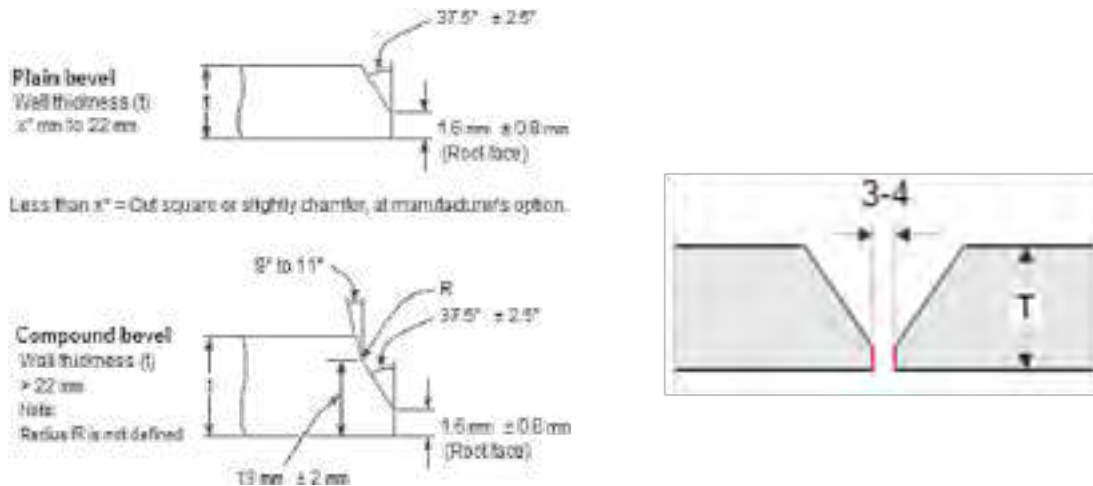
Butt Weld Grooves Preparation
